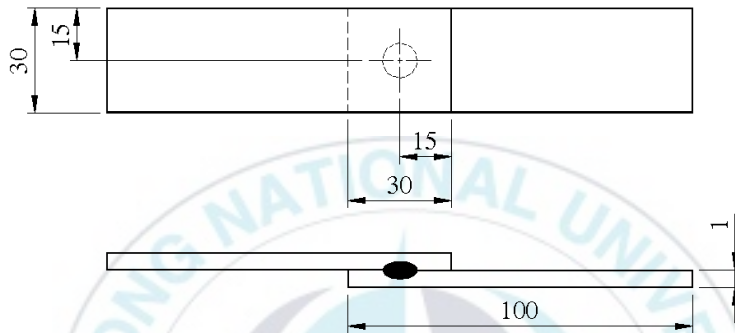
Configuration of welding specimens (Unit : mm)
